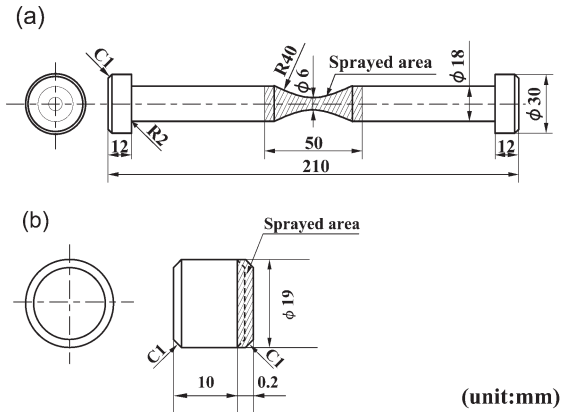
Shape and size of specimen (a) Fatigue test specimen, (b) Corrosion test specimen
